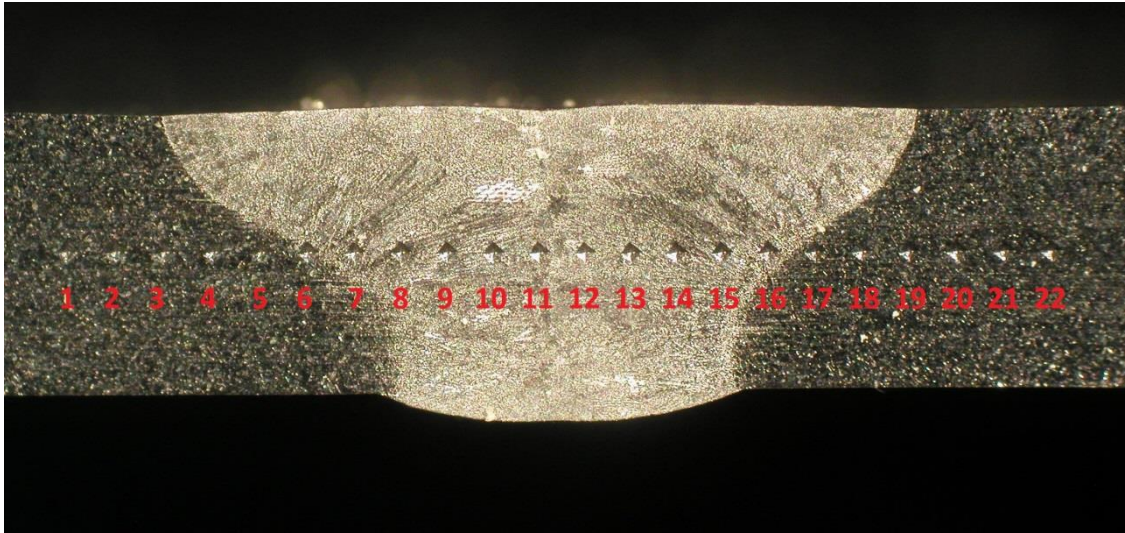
Hardness test measurement points in the weld area of the sheet metal test piece.
